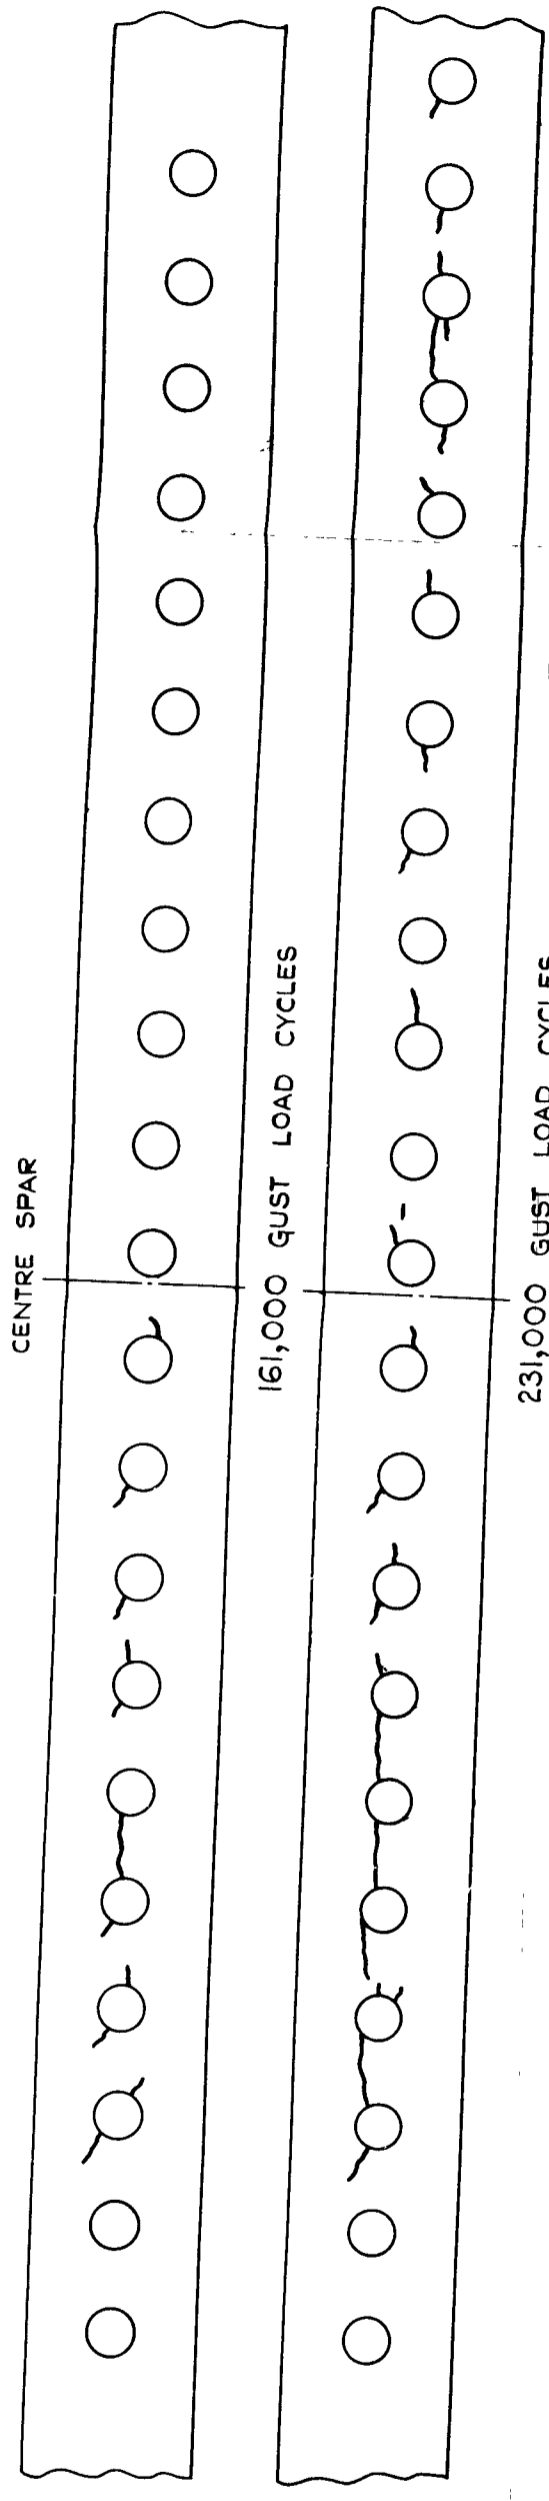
FATIGUE CRACK IN THE VERTICAL FLANGE OF THE EXTRUDED
